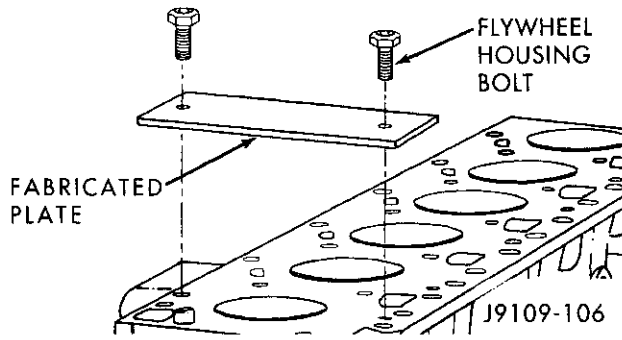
Fabricated Plate Location on No.1 Cylinder
